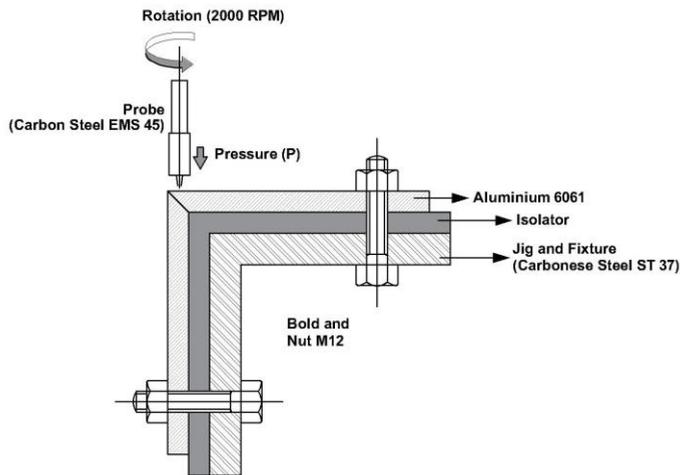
Friction Stir Welding on The Corner Joint
